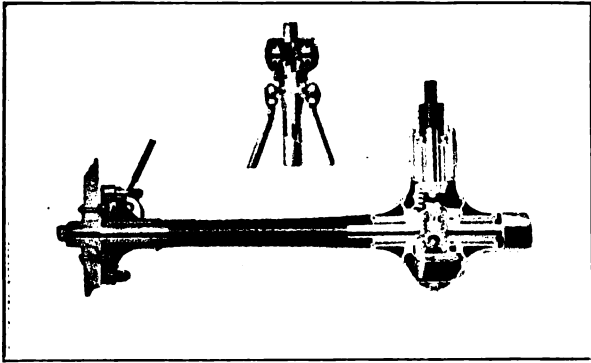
Sectional View of Rear Axle—Smaller Illustration Depicts How Radius Rods Are Retained and Adjusted.
